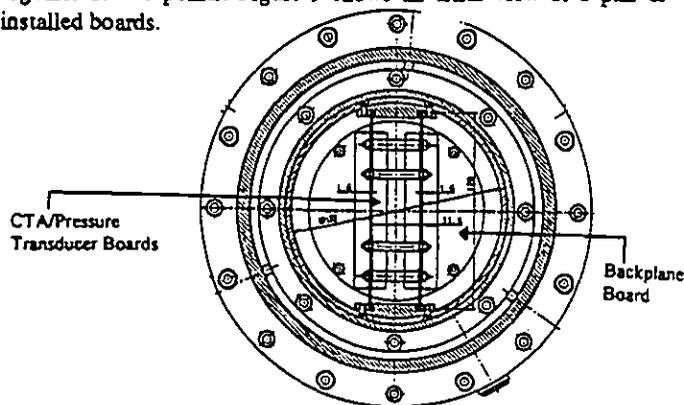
End View of Backplane board in the DLR turbine shaft. (Drawing courtesy DLR)
